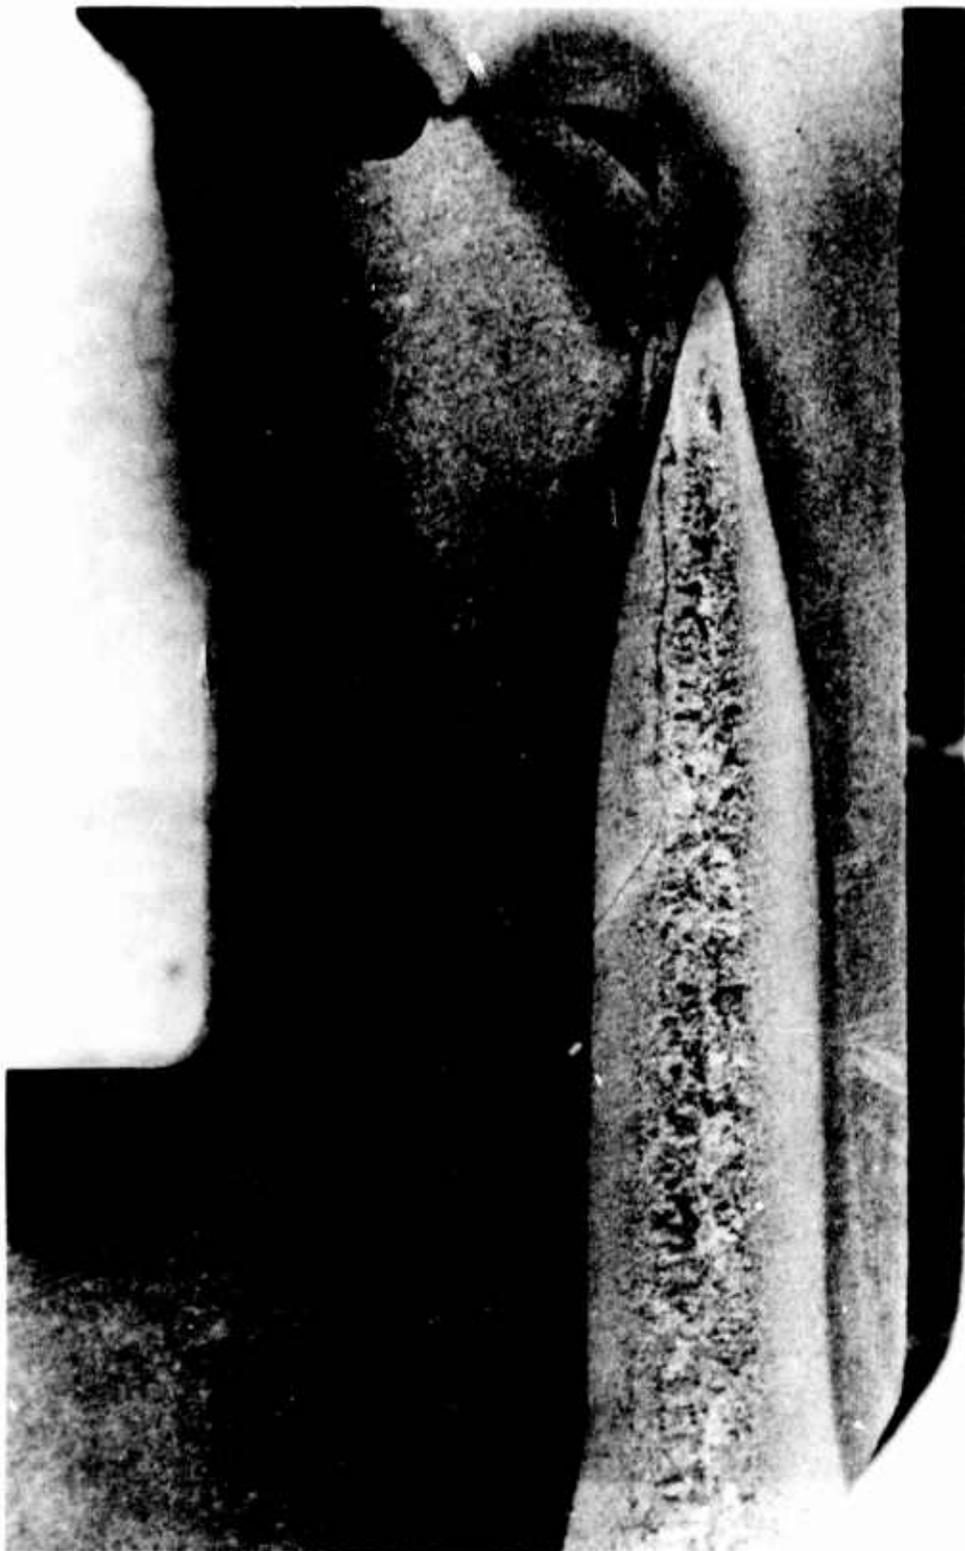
Cross-Sectional Sample Through First-Row Pinion Spalled Roller.
